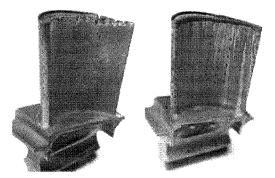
Weld tip repair of DS René 80 first stage turbine blade form CF F404 engine (Courtesy Liburdi Engineering, Hamilton, Ontario)
